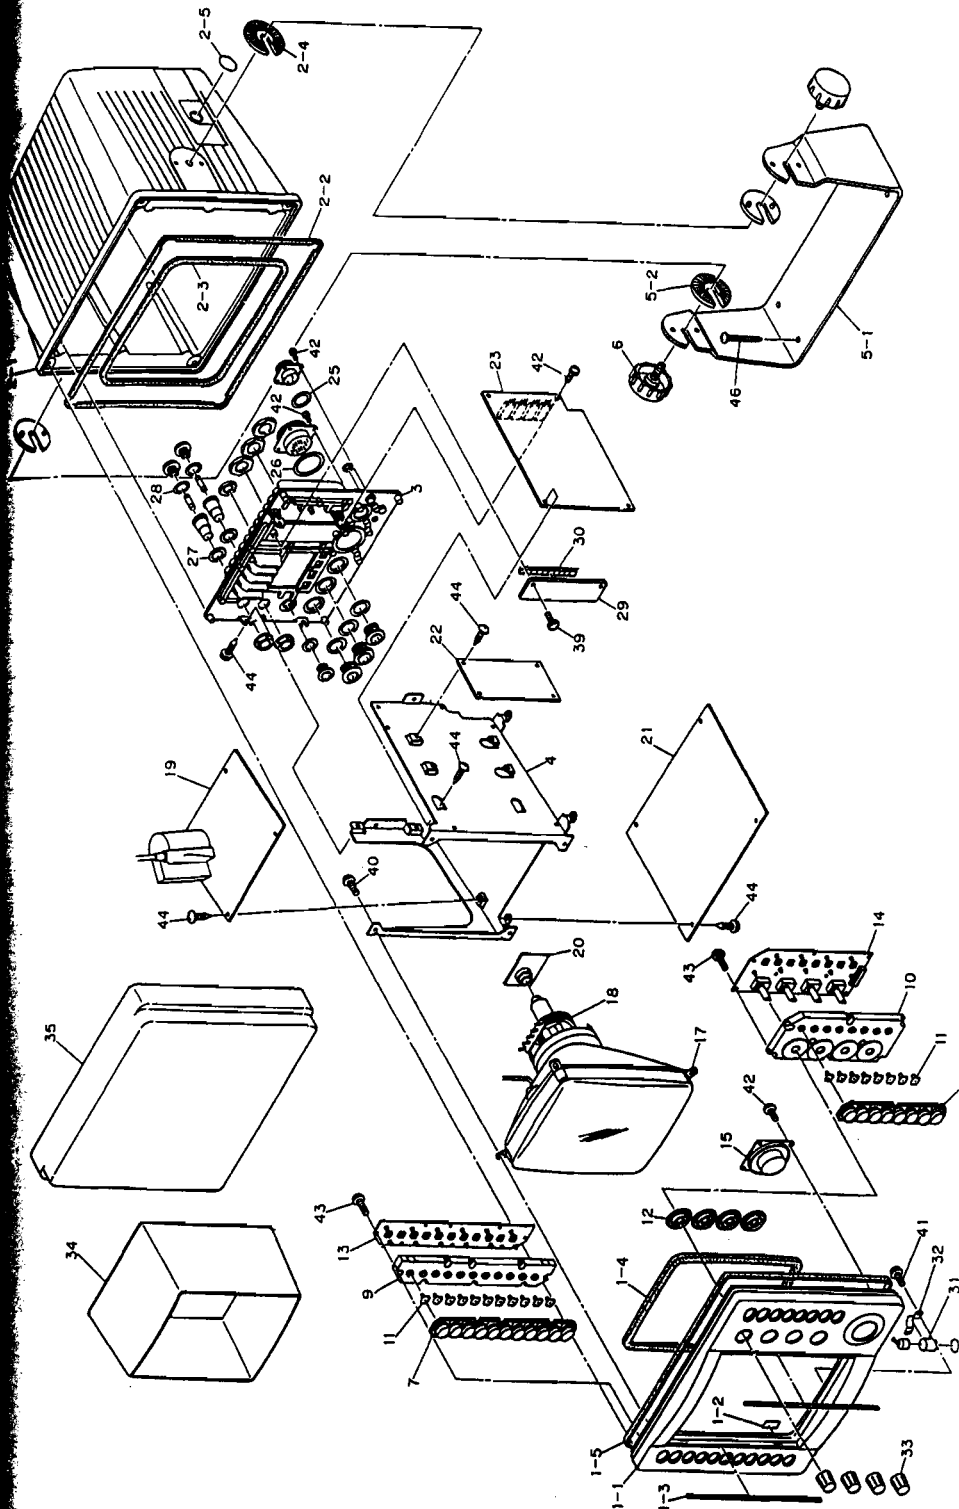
ASSEMBLY DRAWING, R20XX/R21XX DISPLAY UNIT
